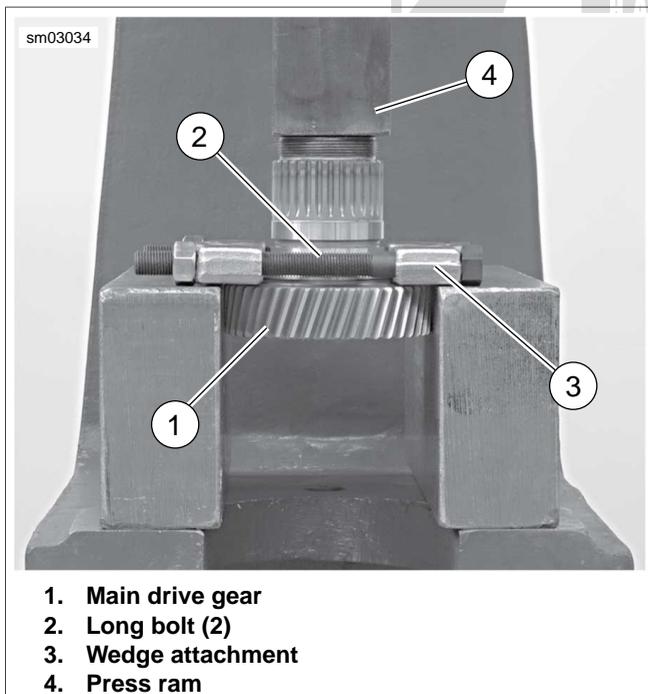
Removing Inner Bearing Race From Main Drive Gear
